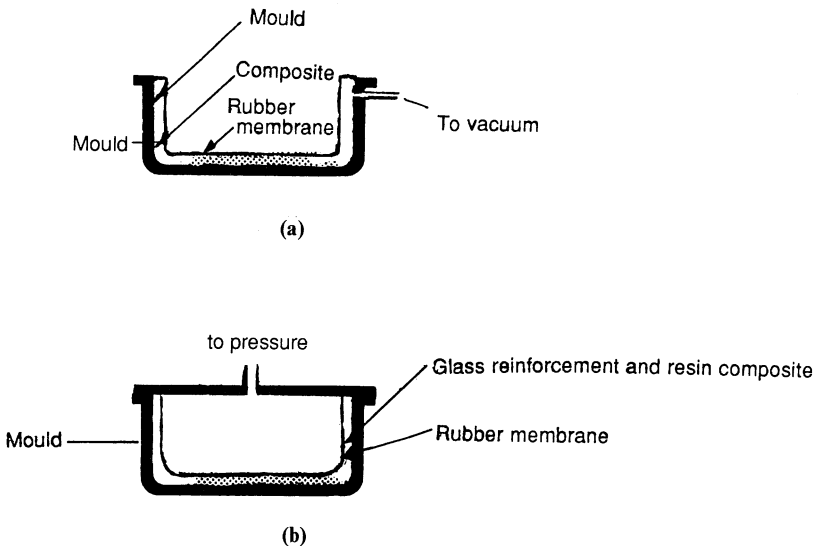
Spray-up moulding technique. (a) Vacuum bag moulding method; (b) pressure bag moulding method.
